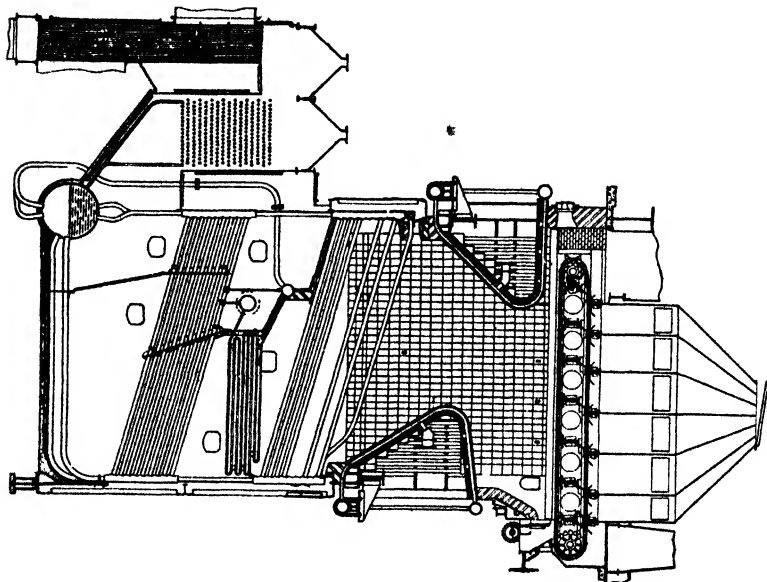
Babcock and Wilcox boiler with interdeck superheater.
